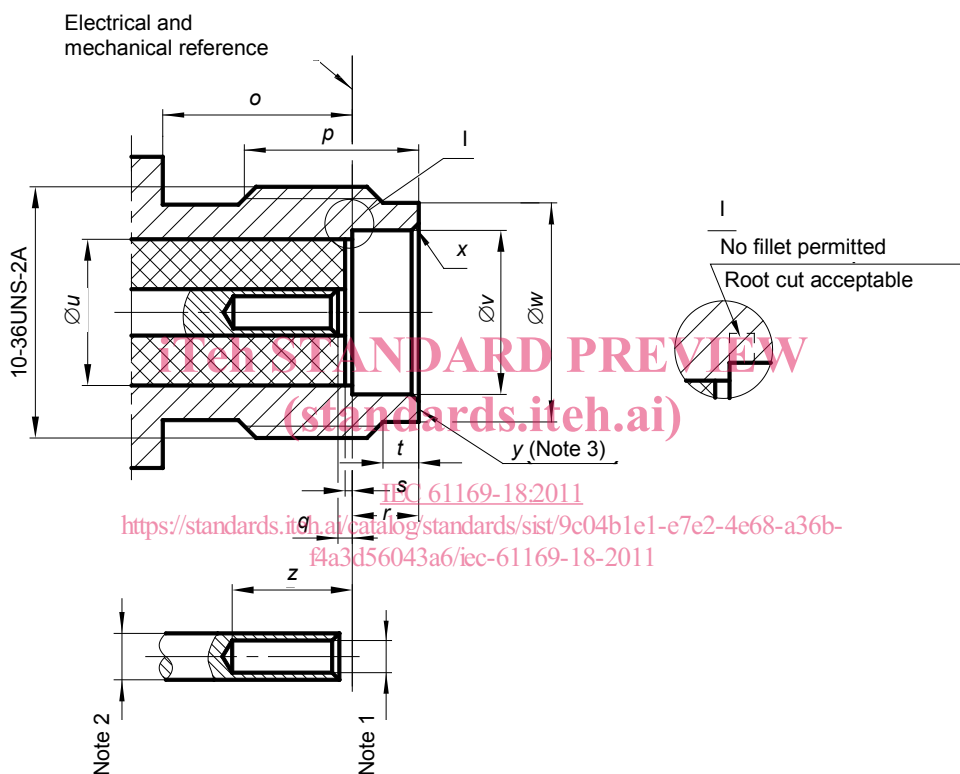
Connector with socket-centre contact (for dimensions and notes, see Table 2)
